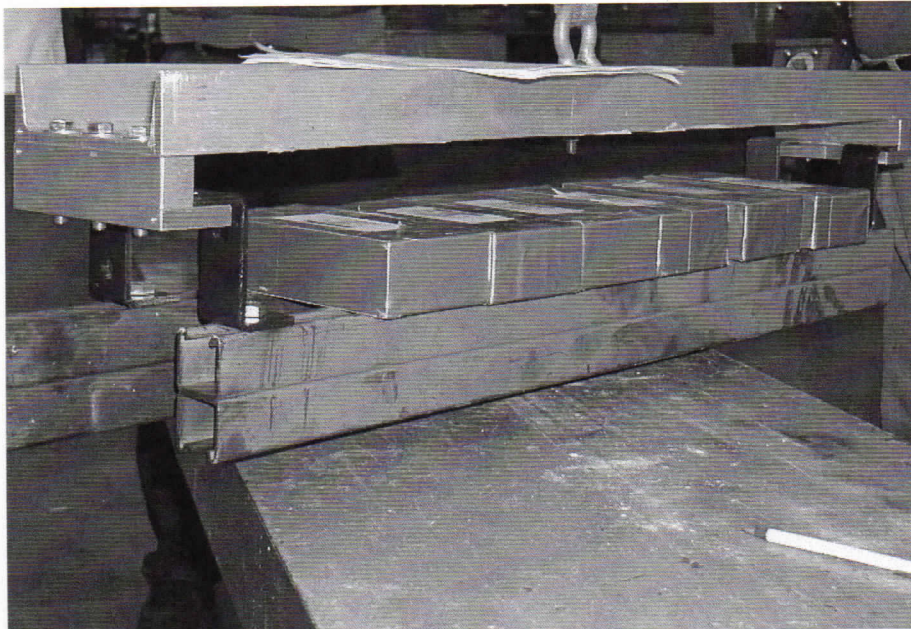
Large Bell Jar lifting fixture loaded 125% of the 130Lb rating.
